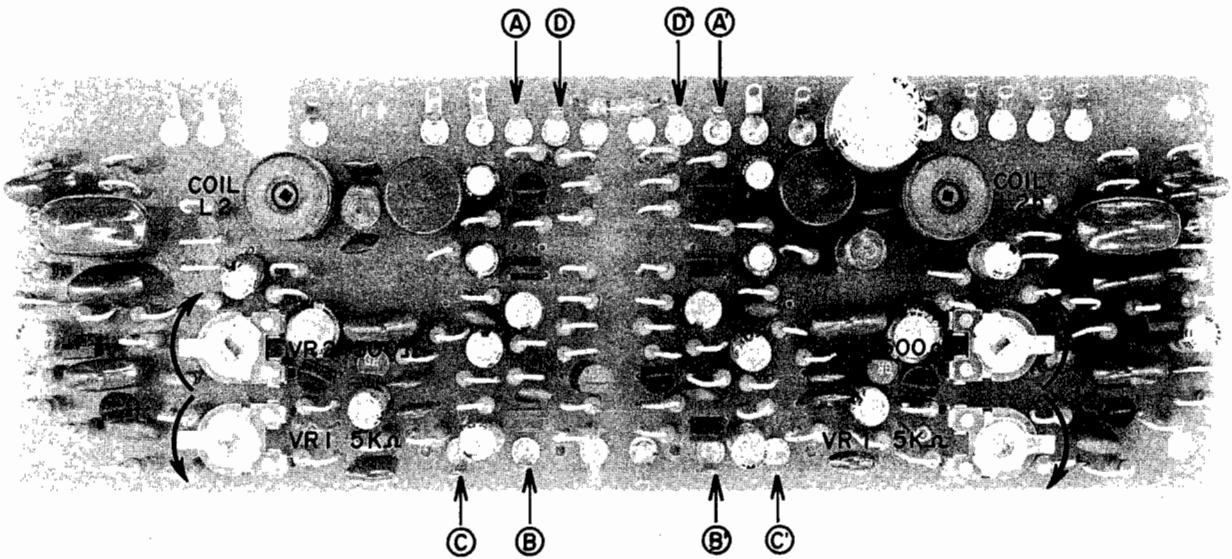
Dolby N.R. P.C. Board CP-5003 (Face Side)
